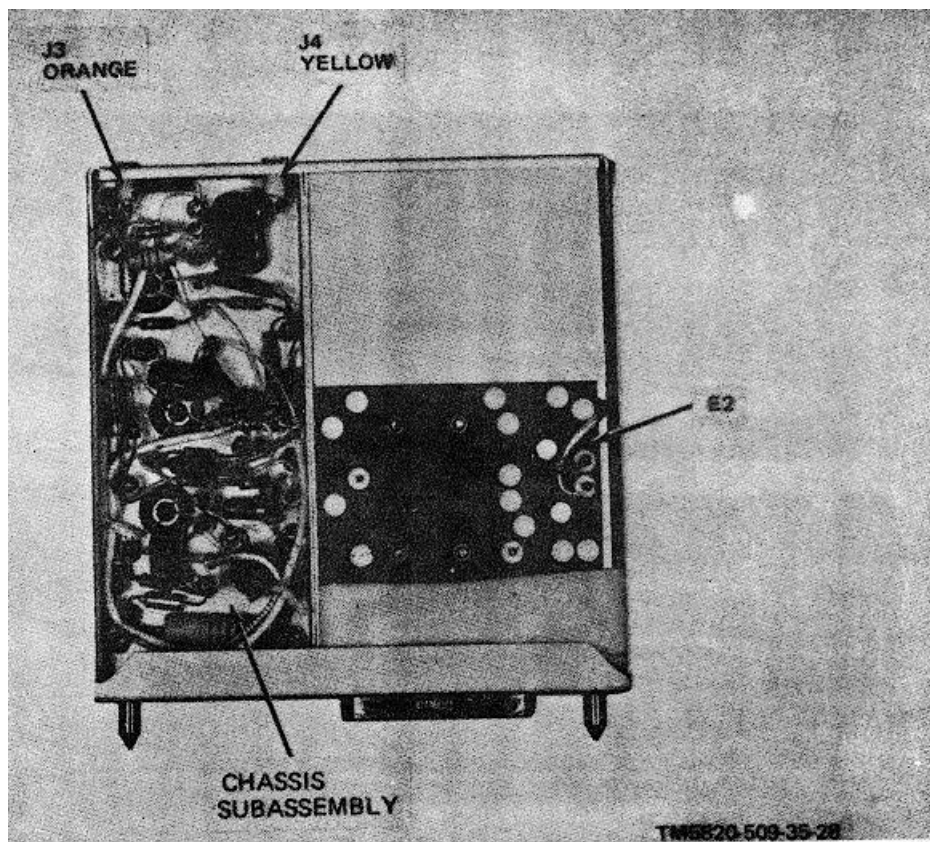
Radio Frequency Oscillator O-1032/PRC-47(A8A6), Side View, Cover Removed, Location of Chassis Subassembly and Test Points.
